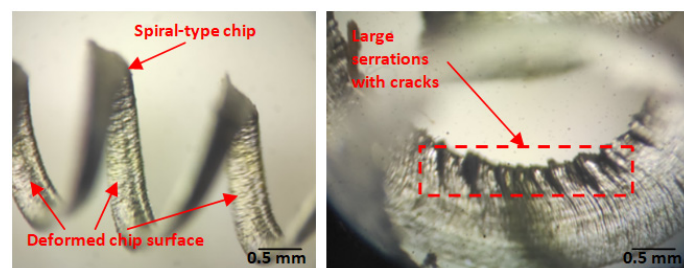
Chip morphology during dry hard-turning of 60CrMoV18-5 cold-work tool steel with CBN cutting insert.
